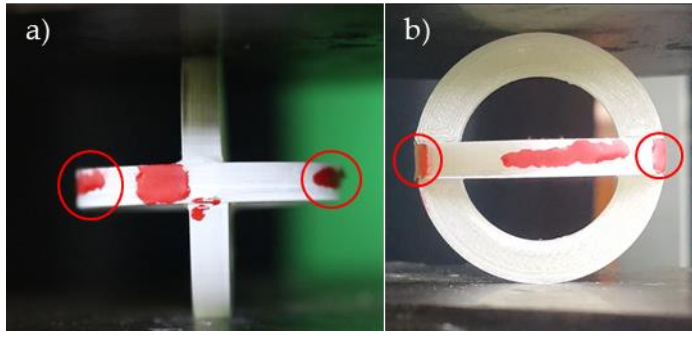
Example of a compressive test of a unit cell a) view of the xz plane; b) view of the yz plane.
